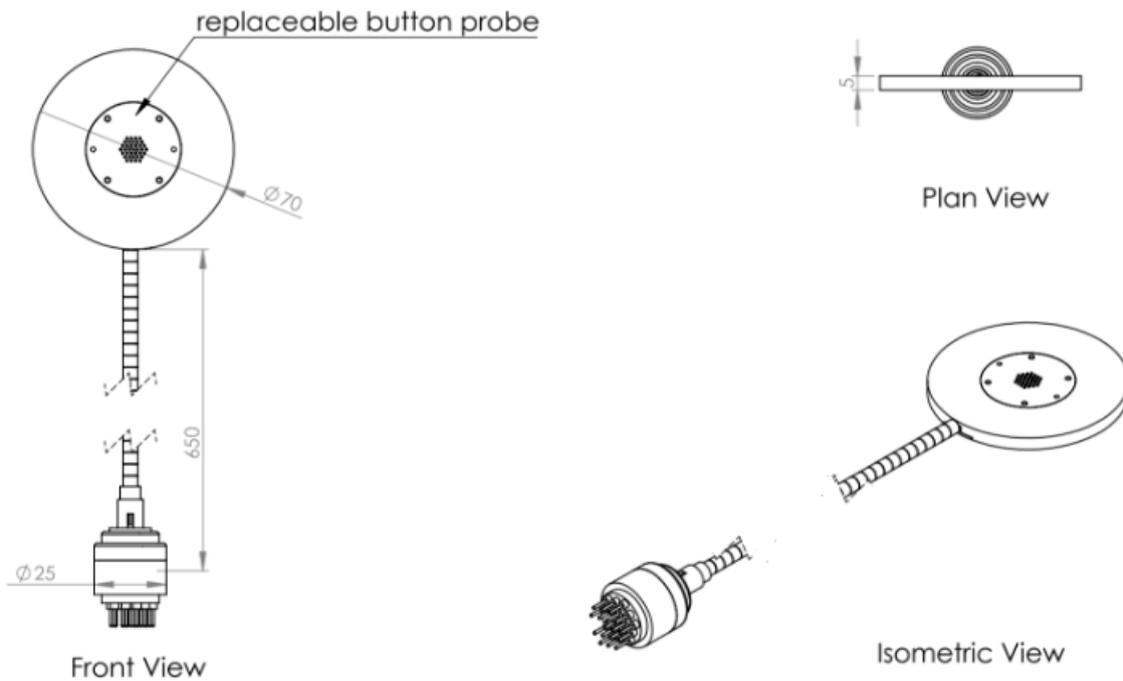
Dimensional drawings of a 70 mm diameter Semion Single sensor holder with 17 pin plug. All dimensions are in mm. The cable length can be specified at the time of order. Drawing for other models available on request.
